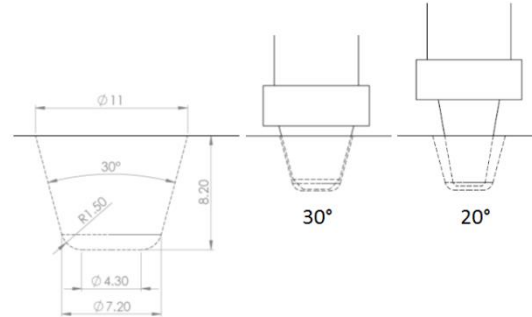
The final geometry of the drilled hole on the left followed by two tool designs for this scenario.
